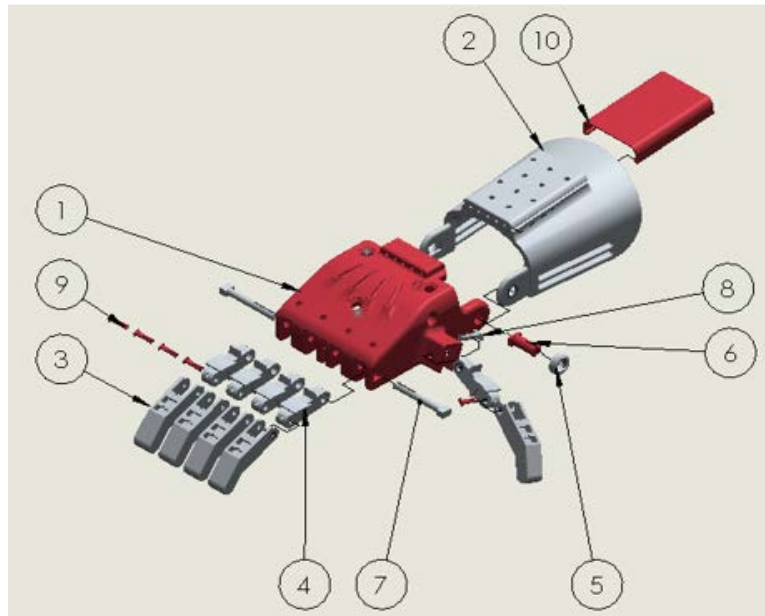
Exploded view of hand showing all the parts labeled with numbers
